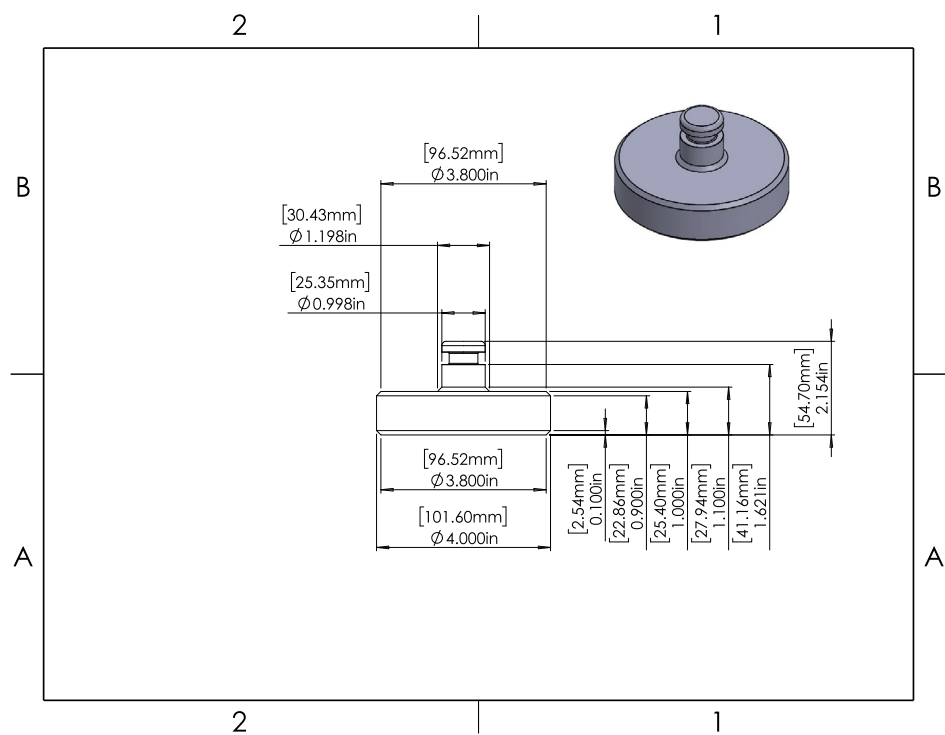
Schematics of vessel plug. For details on o-ring gland, see [Appendix A.2](#).
